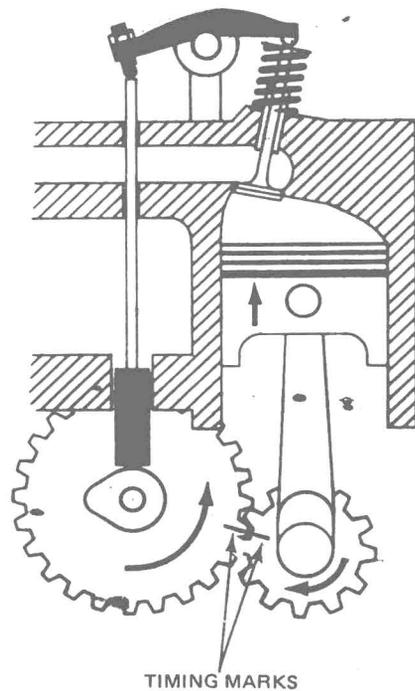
Valve train of Fig. 1-16, showing how the valve closes when the cam lobe moves out from under the valve lifter.
